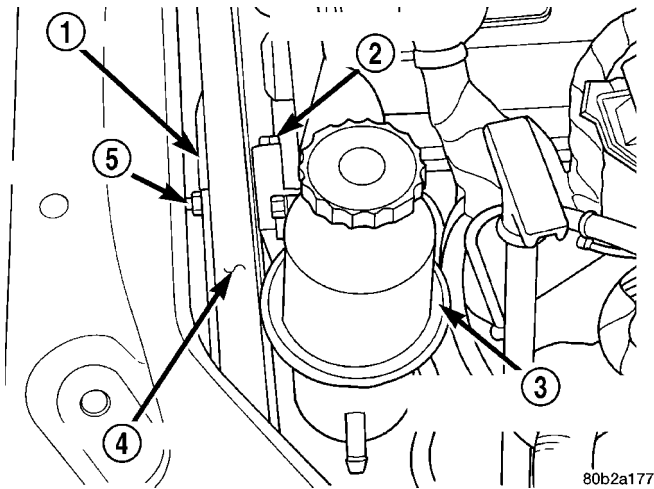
Drive Belt Tensioner Lock-Nut And Adjustment Bolt
